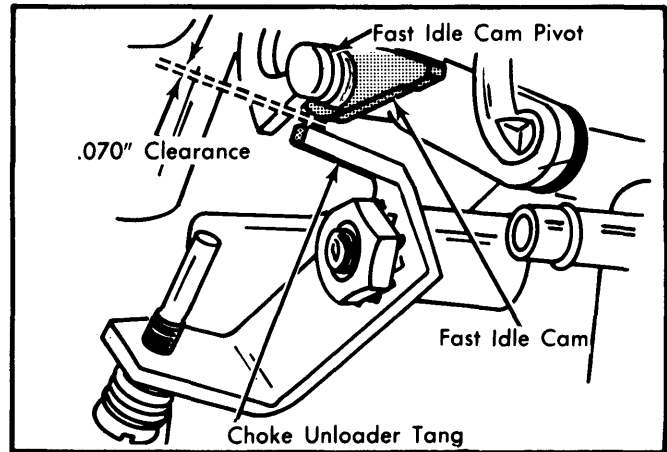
Unloader-to-Fast Idle Cam Clearance
